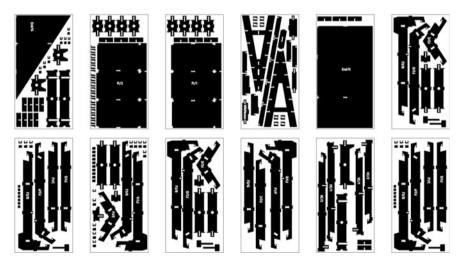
Files ready to be cut by a CNC machine out of standard material like plywood sheets (© WikiHouse)
